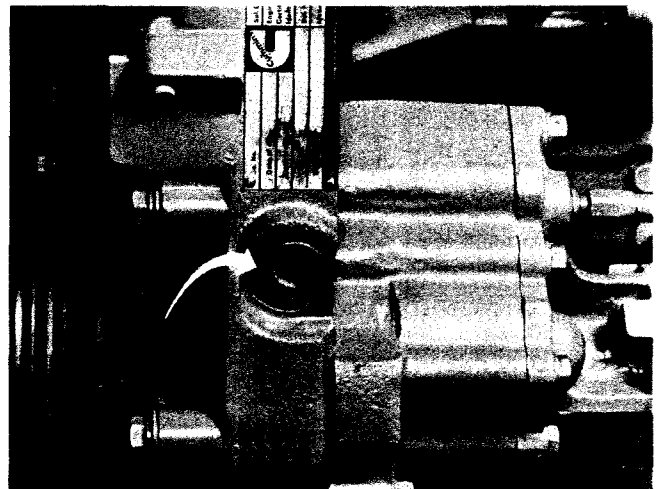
, (N11985). Lubricating system priming point — N/NT-855 Engine
